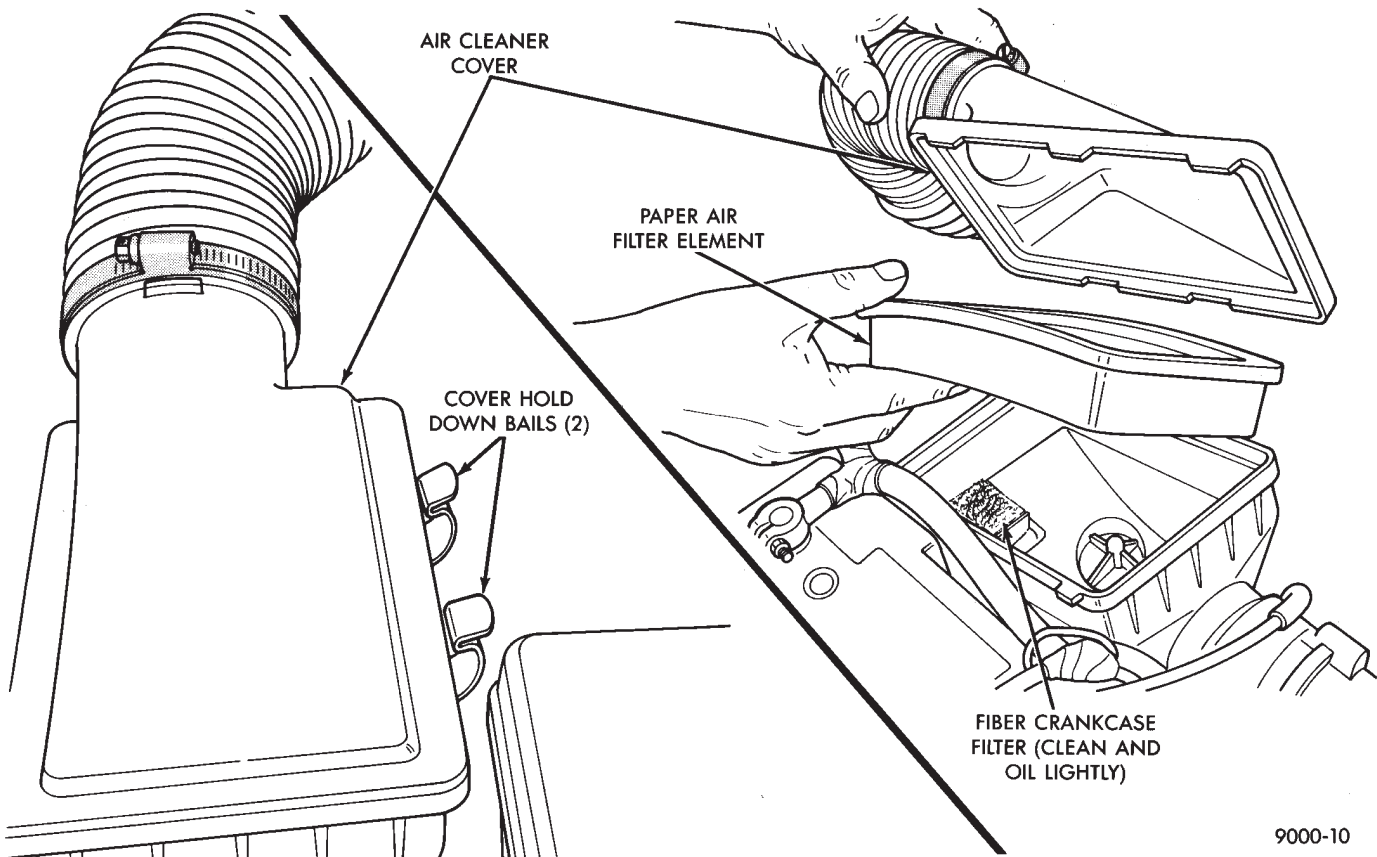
Air Cleaner Assembly—3.3L or 3.8L Engine
